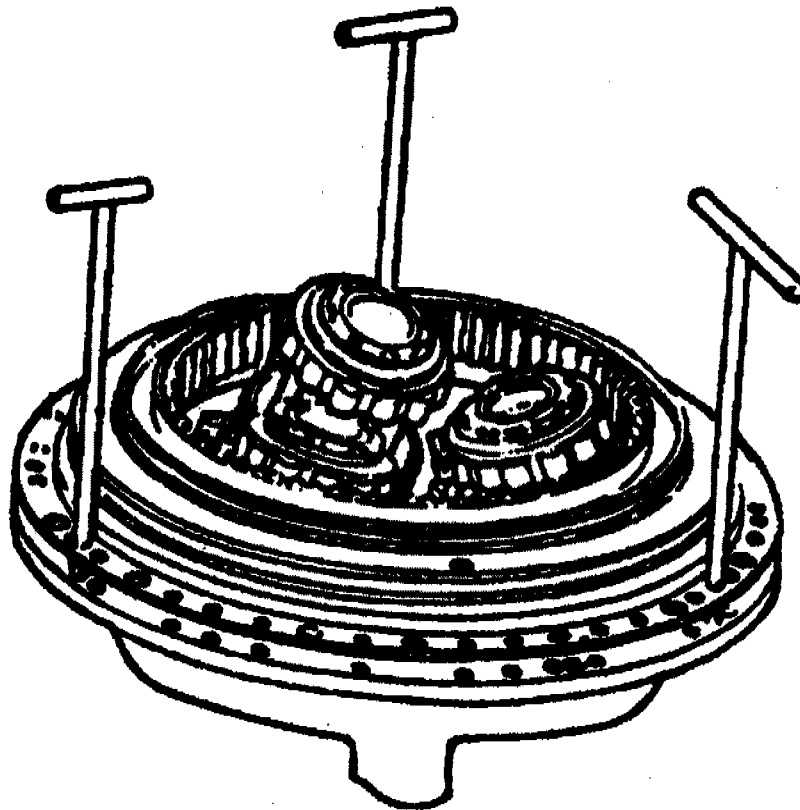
Removal of Internal Reduction Gear and Torquemeter Plate Assembly (T53-L-15).
